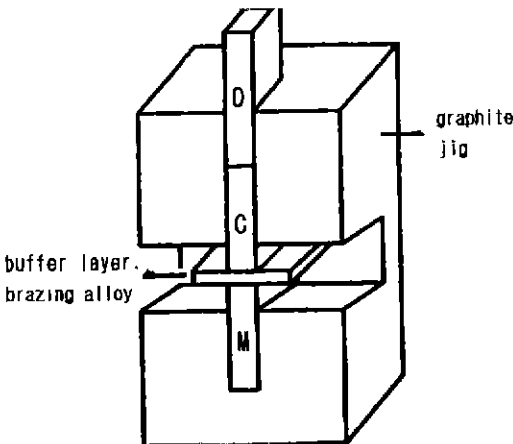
Schematic diagram of jig & Specimen fixture for ceramic/metal joining.
